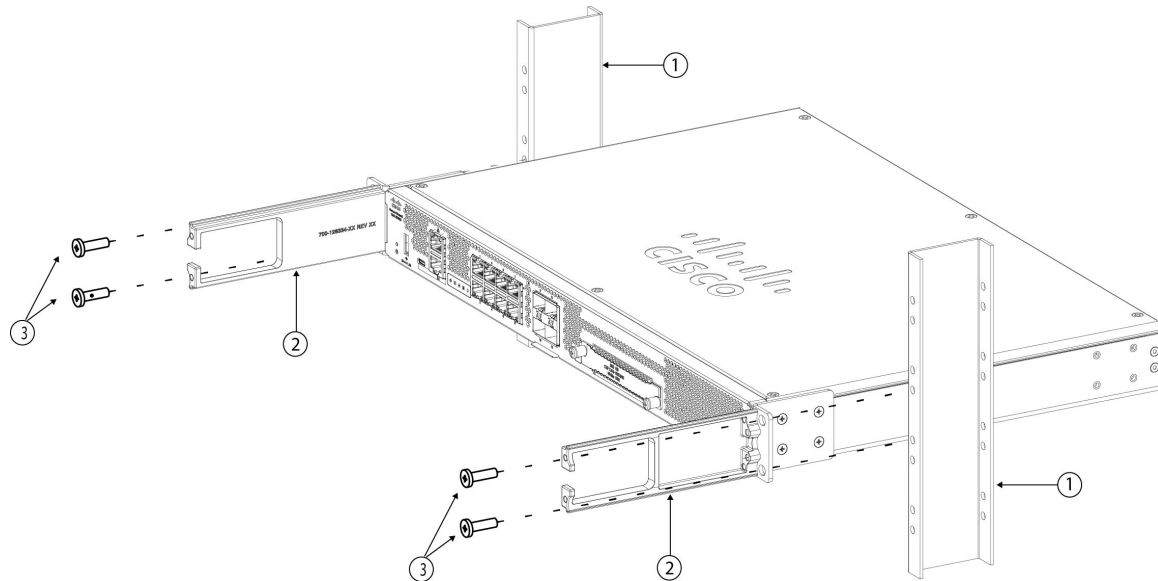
Attach the Rack-Mount Brackets to the Chassis
